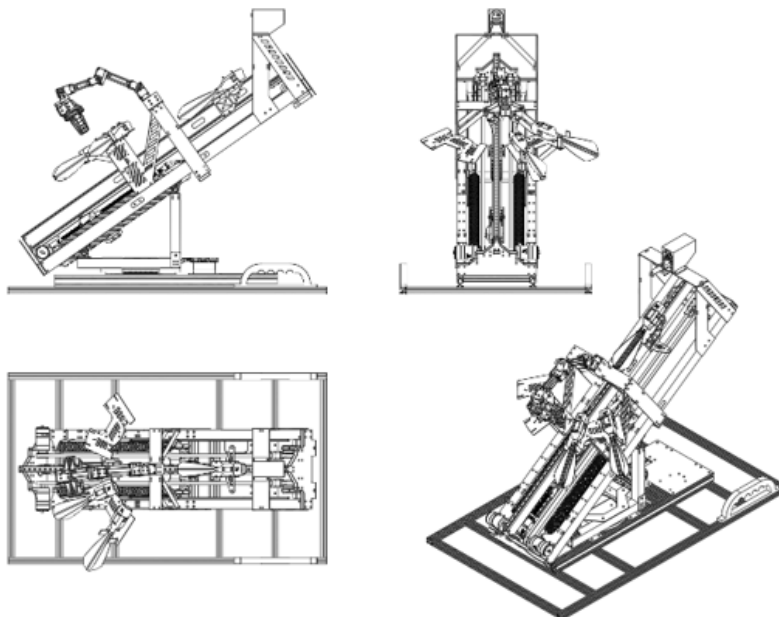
CAD assembly of the integrated arm, launcher, and chassis from the design document.
